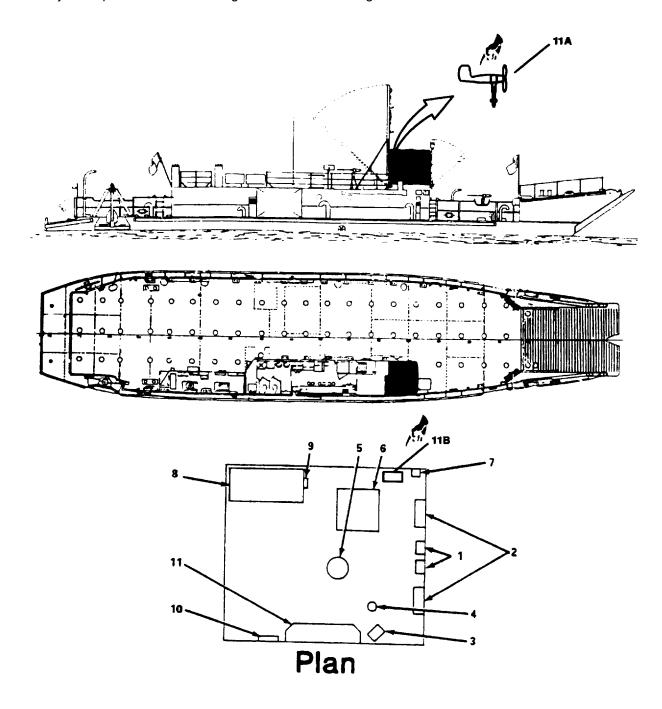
Conning Tower (Sheet 1 of 3).
